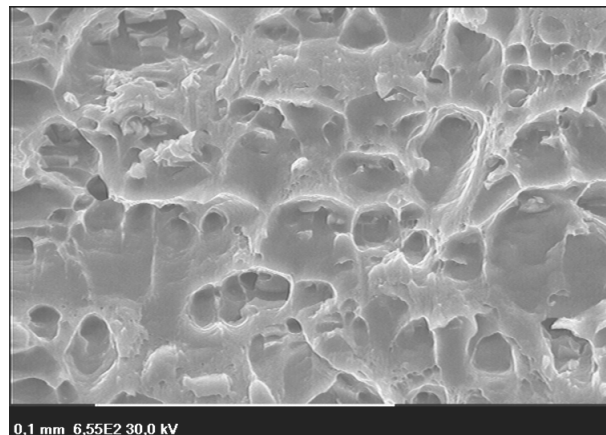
Ductile fracture of 710/560L samples after tensile test – the weld centre
